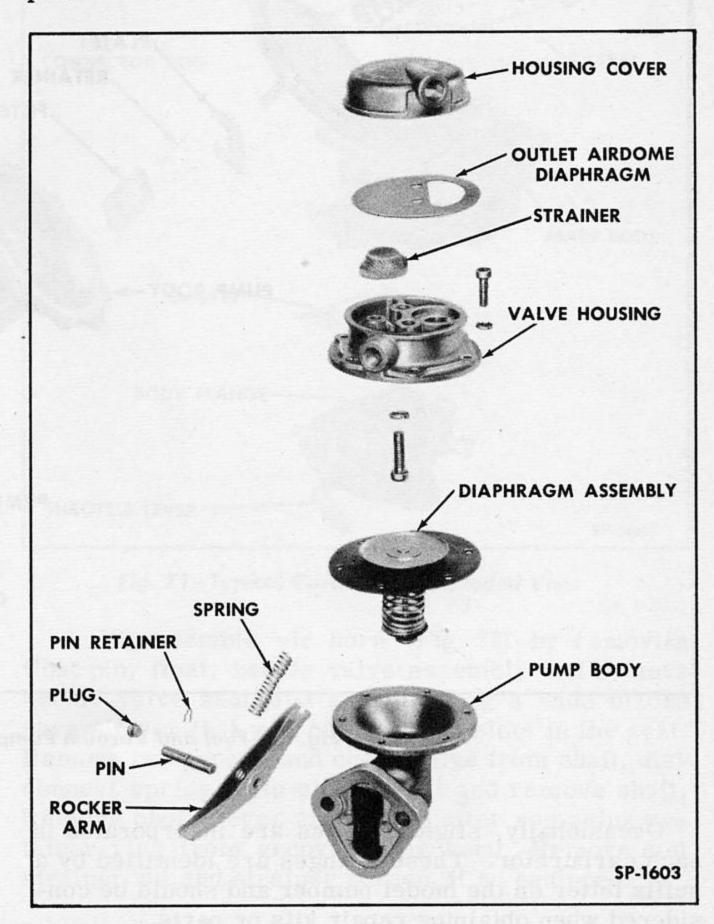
Single Diaphragm Fuel Pump—6 Cylinder—Exploded View
